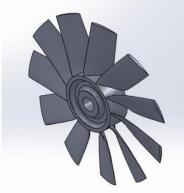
The Nyborg MPV-D1E fan blade model in Solidworks CAD [5]
